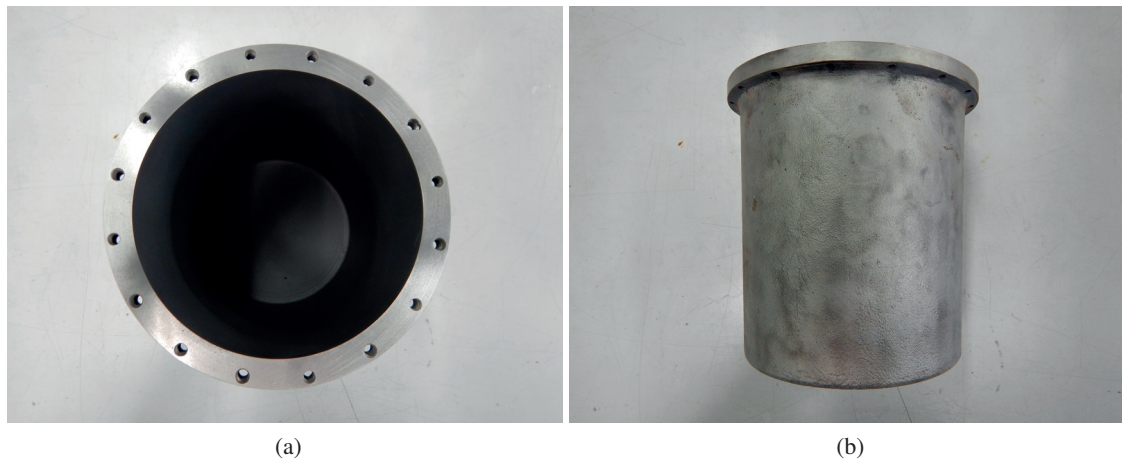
Chamber manufactured for the casting of AlSi12 aluminum alloy into the salt molds from (a) top and (b) side views
